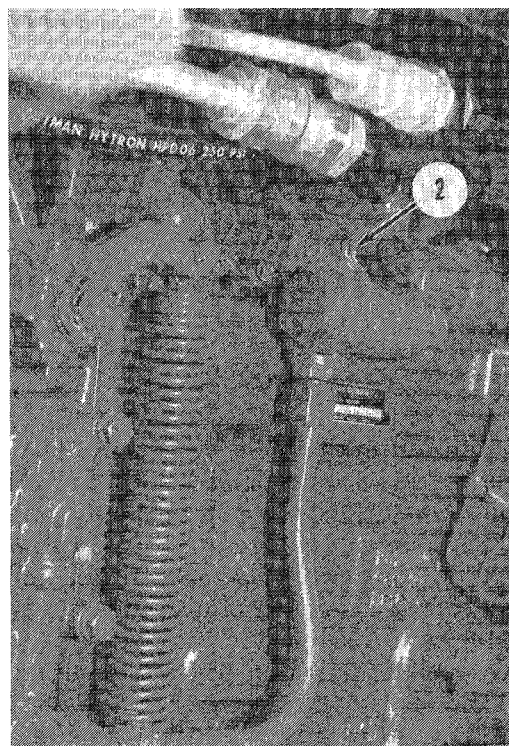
To check lube pressure, install a 0-60 psi (0-400 kPa) pressure gage to return oil manifold test port (2).
